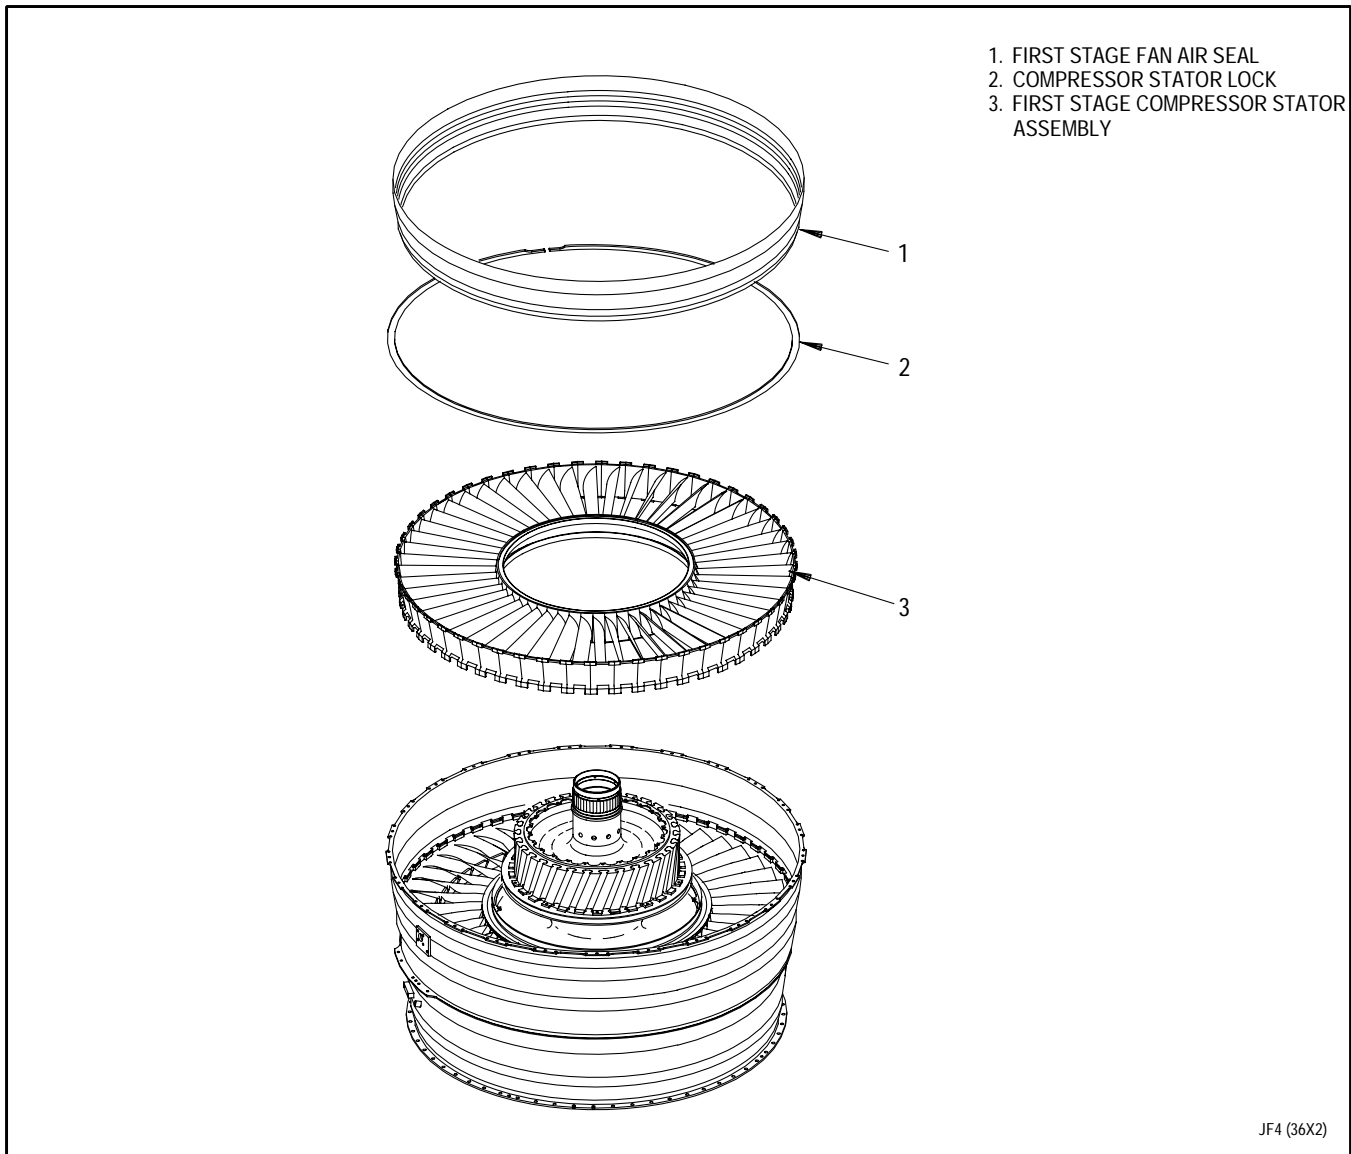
First Stage Compressor Stator Assembly and First Stage Fan Air Seal - Installation
